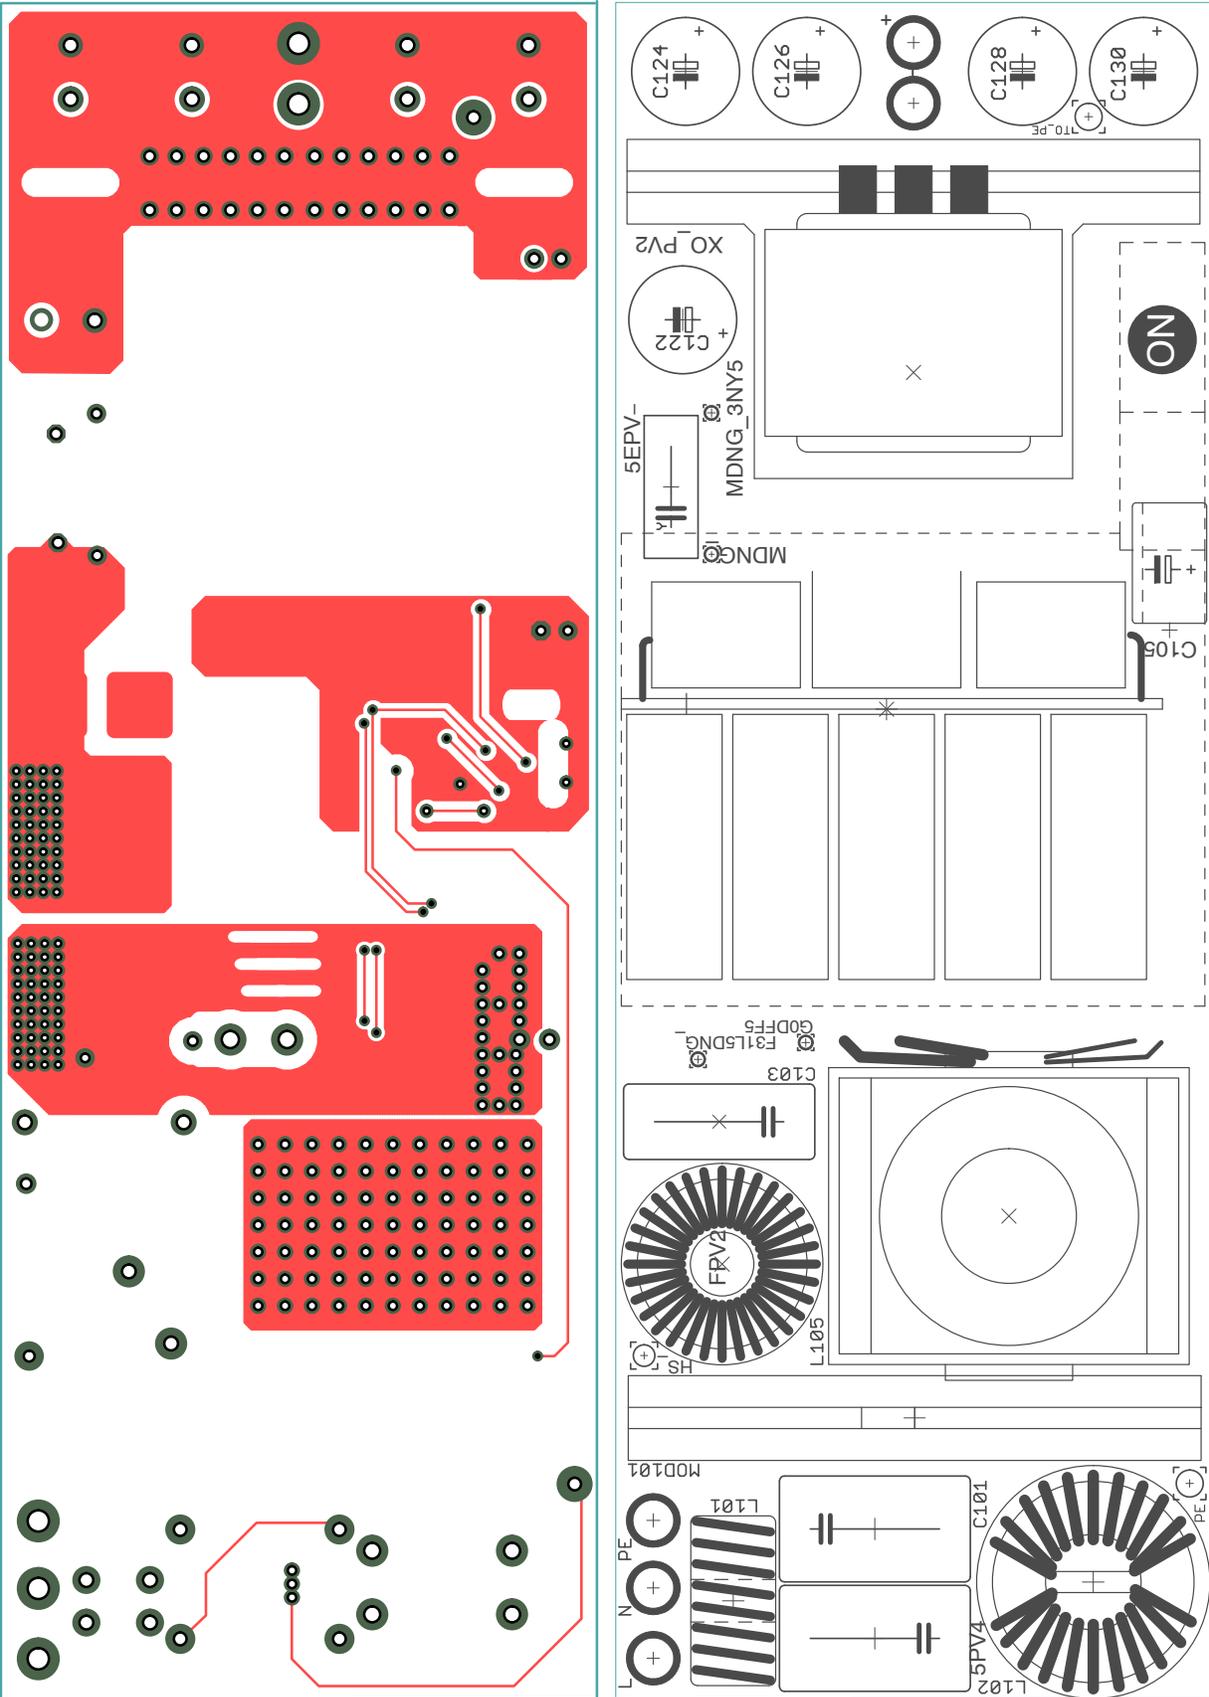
Top Layer PCB Layout and Assembly Plan of MAIN BOARD
